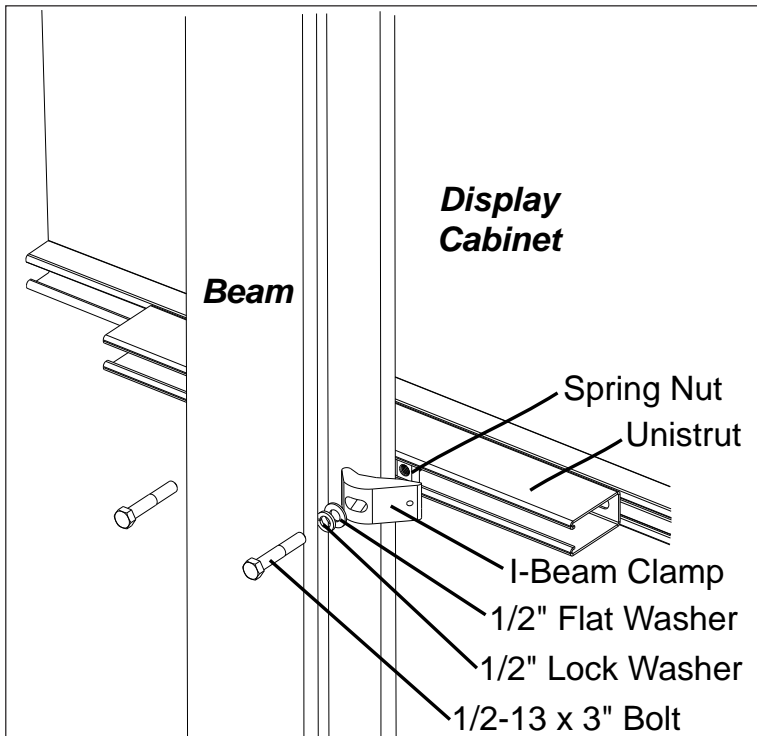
I-beam Clamp Mounting (LVX), Rear Rotated View
